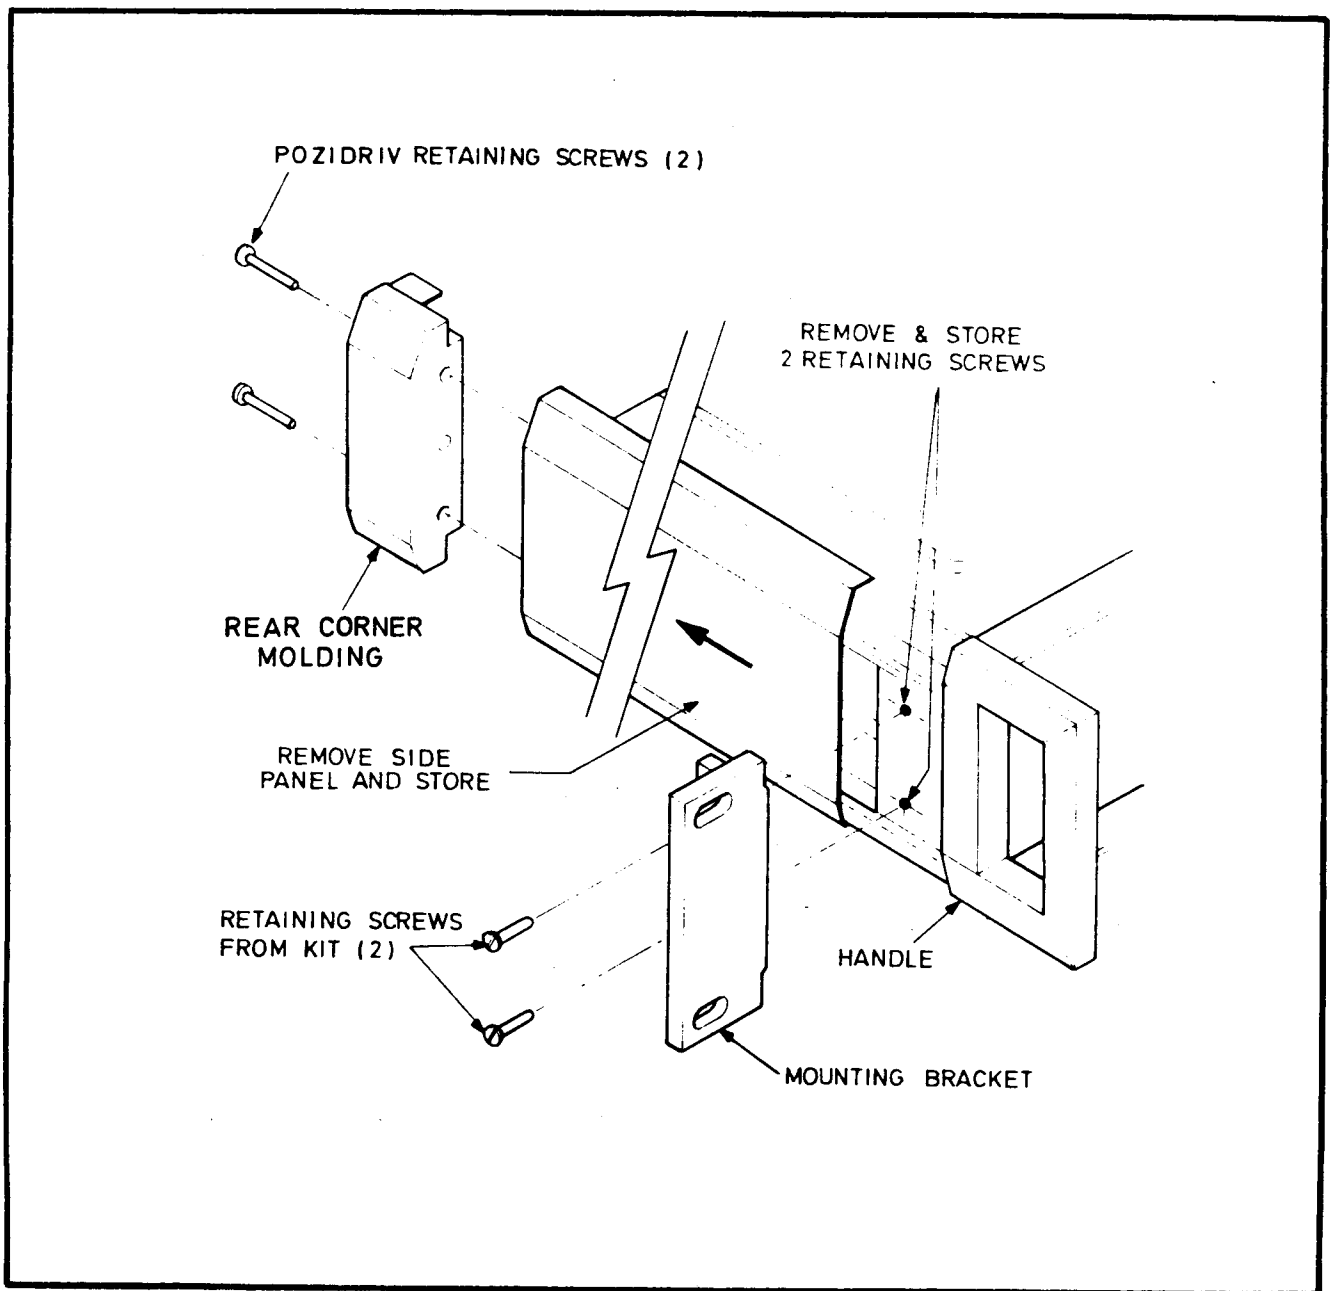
Fitting the Rack Mounting Kit 11-1576
